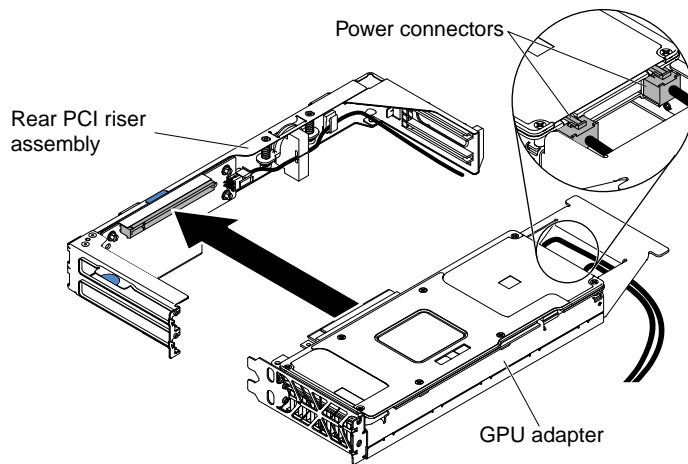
GPU adapter installation (with rear PCI riser assembly)
